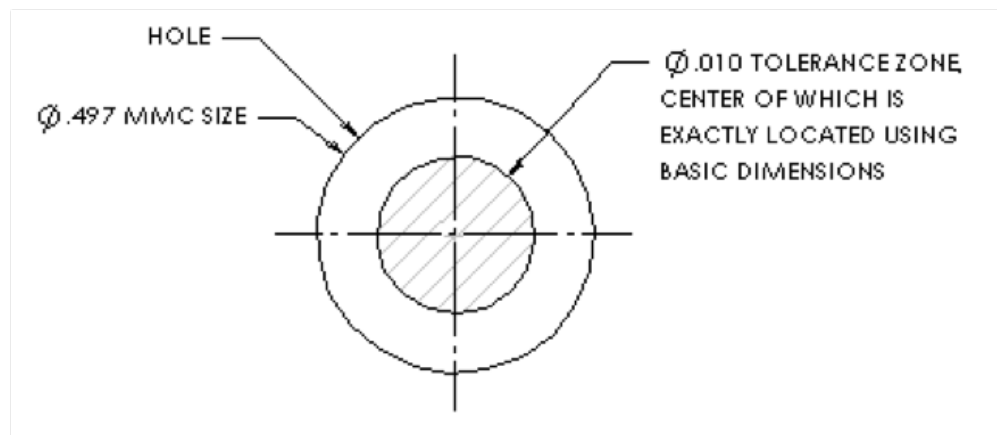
Tolerance zone for a hole dimensioned with GD&T.
